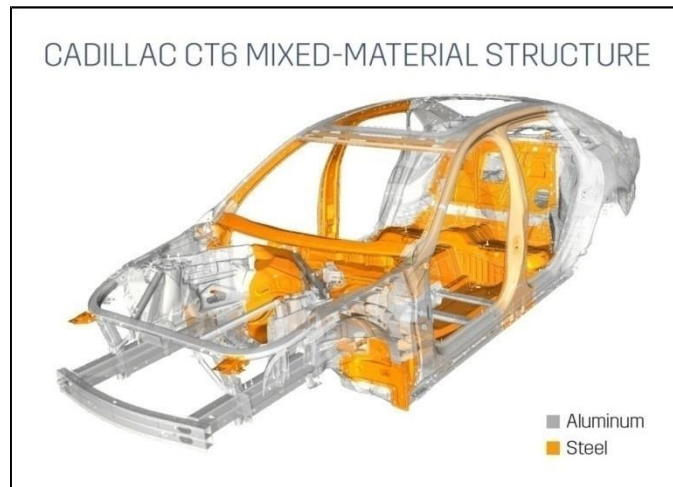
2016 GM Cadillac CT6 Body Structure (General Motors)
